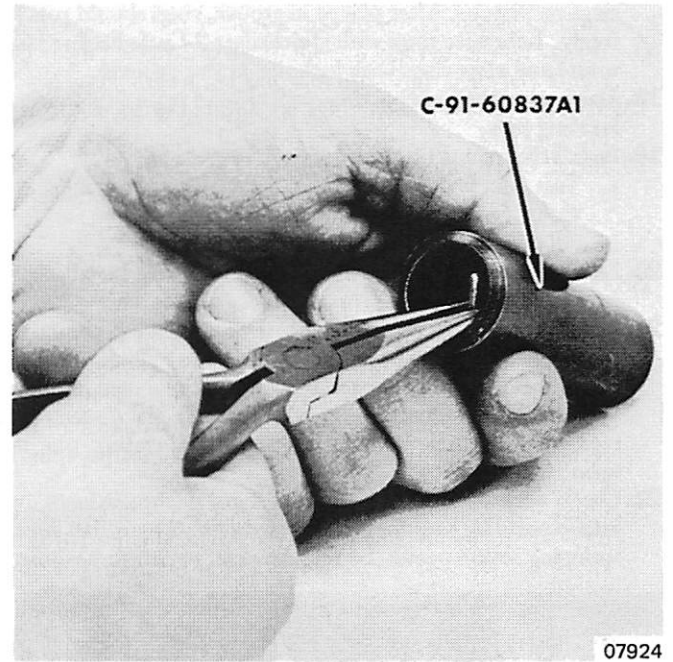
Inserting Piston Pin Retaining Locking into Tool
